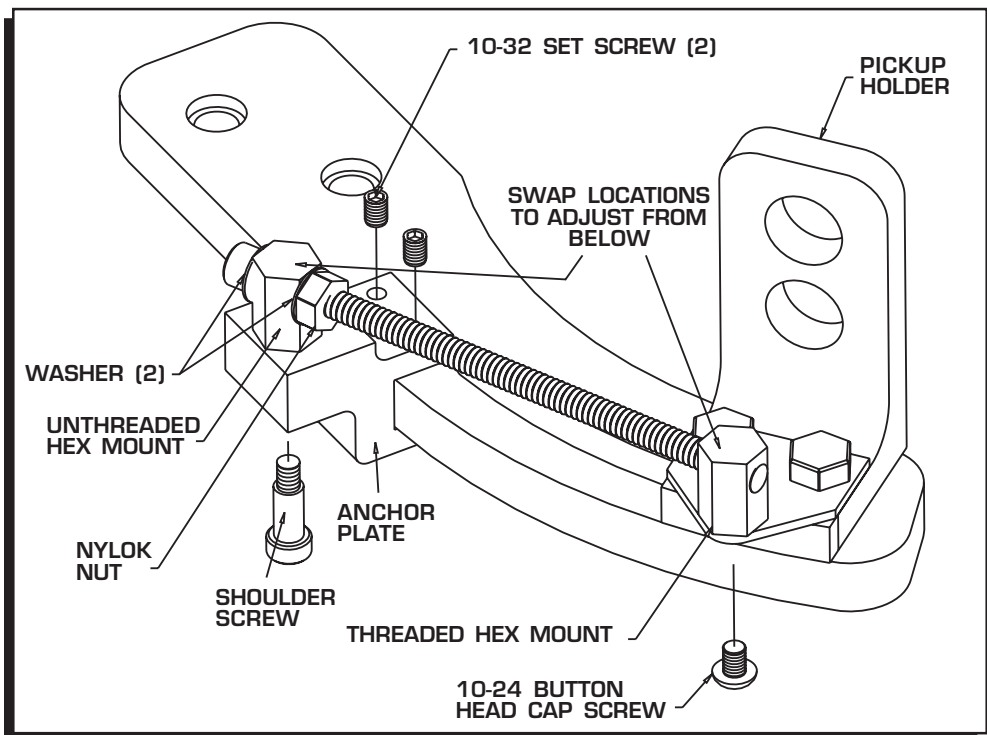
Assembling the E-Z Adjust Crank Trigger Kit.
